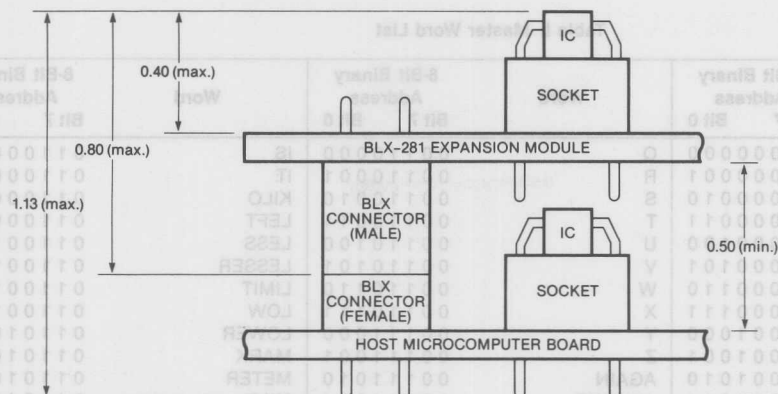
BLX-281 Expansion Module Mounting Clearances (inches)
